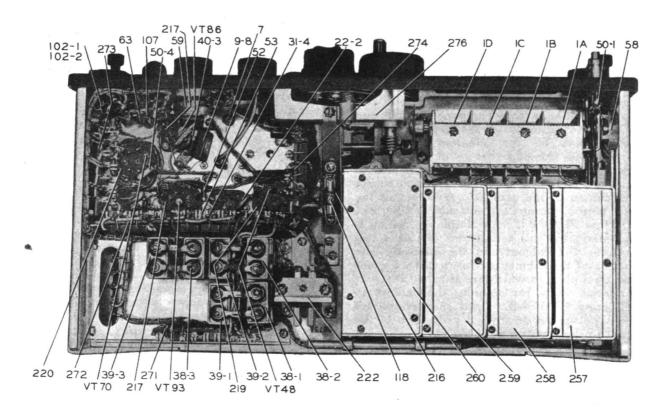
RADIO RECEIVER BC-224-B: BOTTOM VIEW OF CHASSIS
